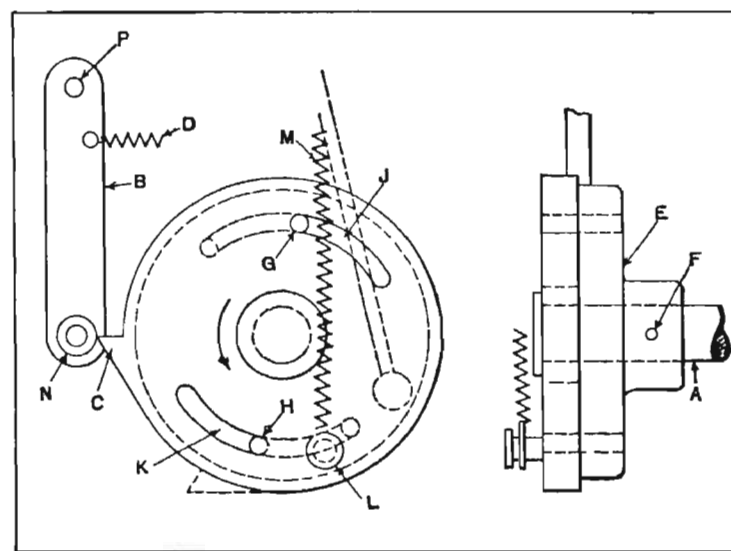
Mechanism for Automatically Starting a Machine after Stopping it Momentarily
